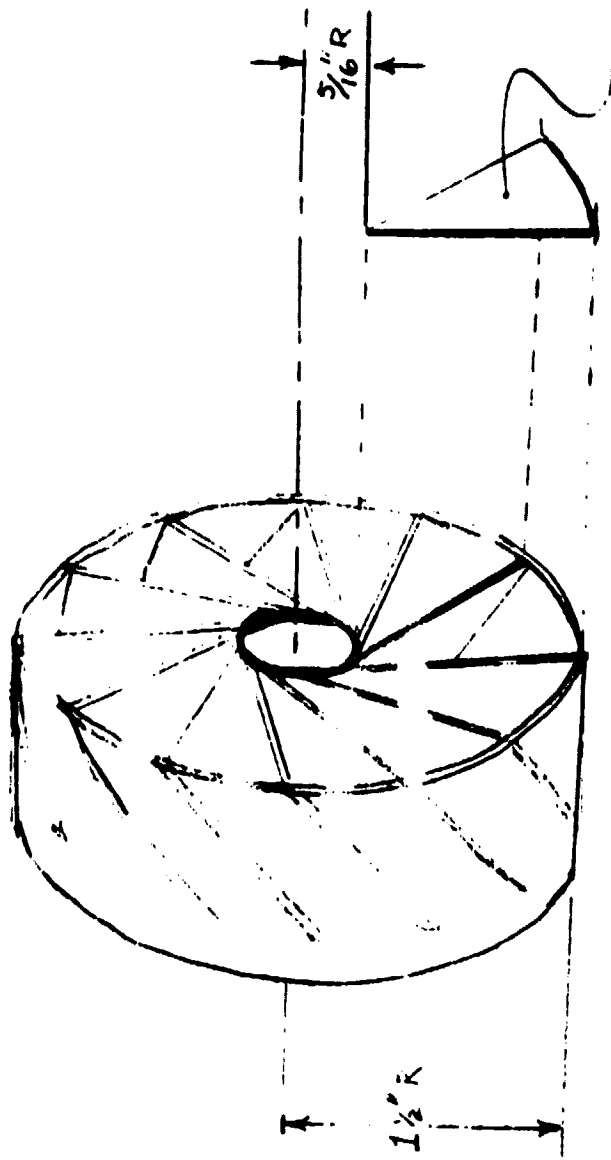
Assembly Diagram of the Swirler Vanes and Blockage Plate.
